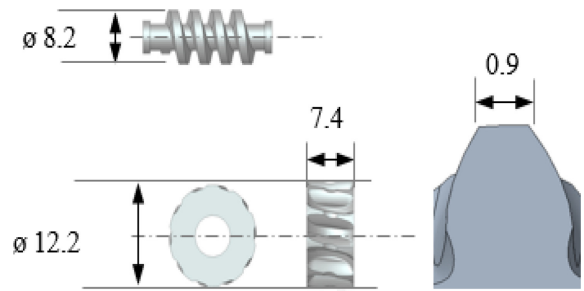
Geometry of the Worm & Worm wheel gear pair
